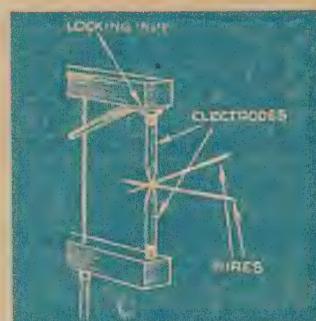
Electrodes welding two wires at right-angles.
